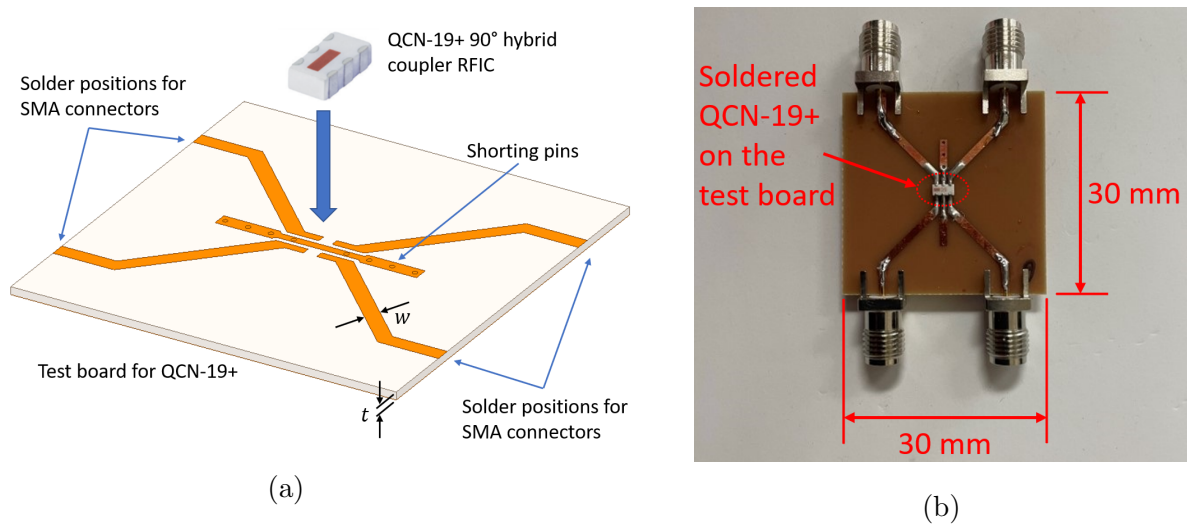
(a) Test board and QCN-19+ on-chip quadrature hybrid. (b) Assembled test board with soldered QCN-19+ in the center and SMA connectors
